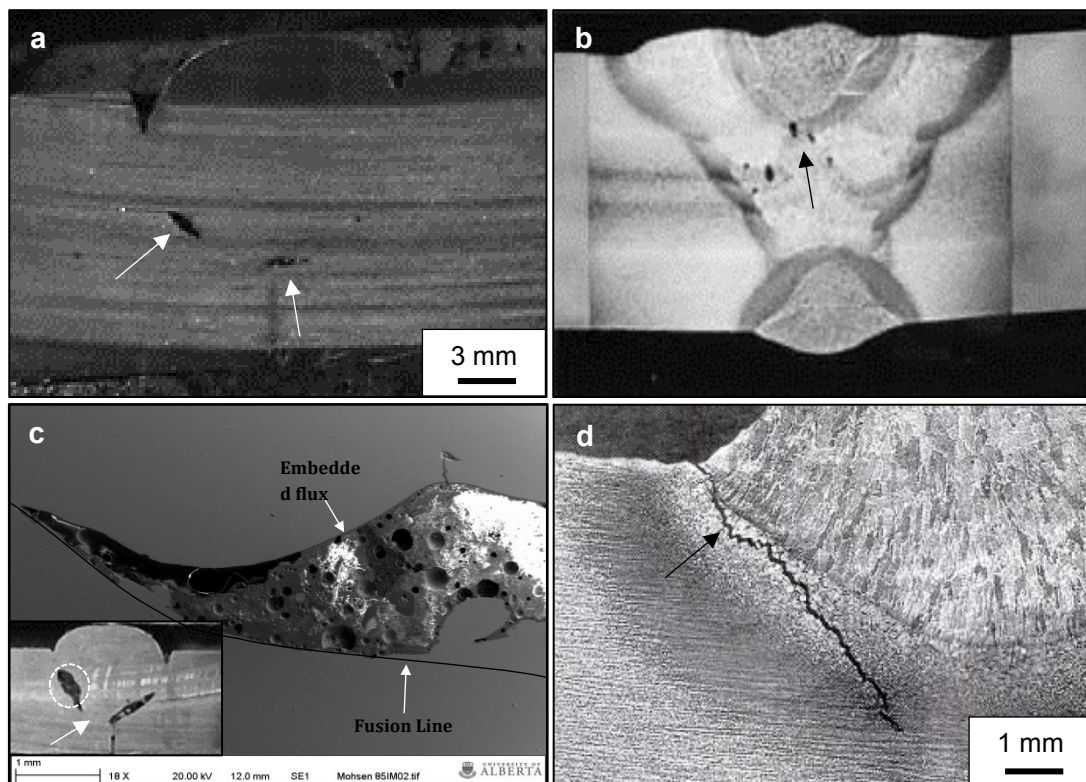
Macrographs of typical internal weld defects: (a) Lack of fusion, (b) internal porosity [319], (c) flux entrapment and (d) hydrogen cracking [151].
